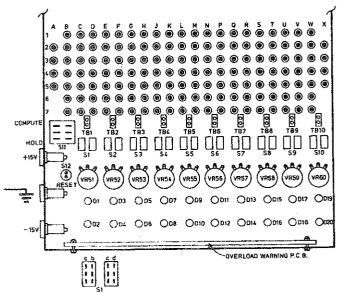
Layout arrangements for edge connectors, patch panel and switches
